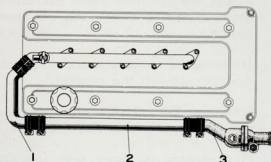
Water Outlet Housing Connectors & Hoses Y2325
